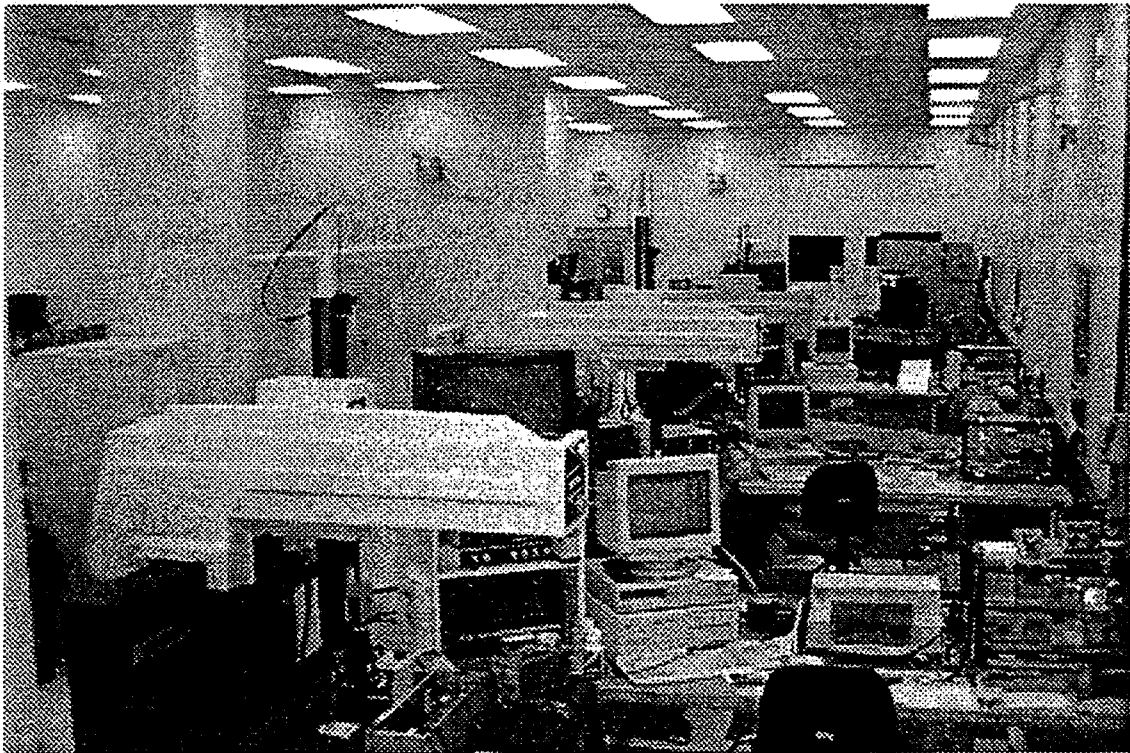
A part of the SiDet module assembly area in Lab D containing G&L CMM's to be used by CDF.
